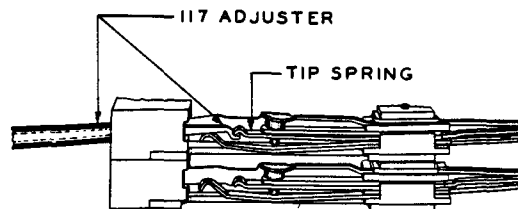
Method of Adjusting Tip Spring Up in 92-, 292-, 510-, 511-, and 512-Type Jacks
